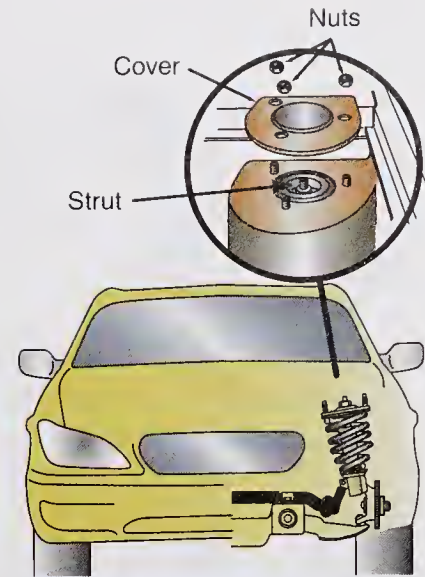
Removing the upper strut mount retaining nuts.
